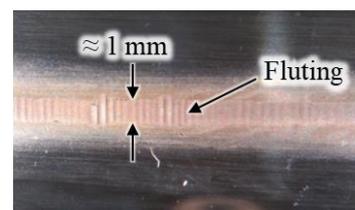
Bearing surface damage (fluting), Rotor-to-earth bearing current, Apparent current density  $1 \text{ A/mm}^2$ , After 1000 hours operation
